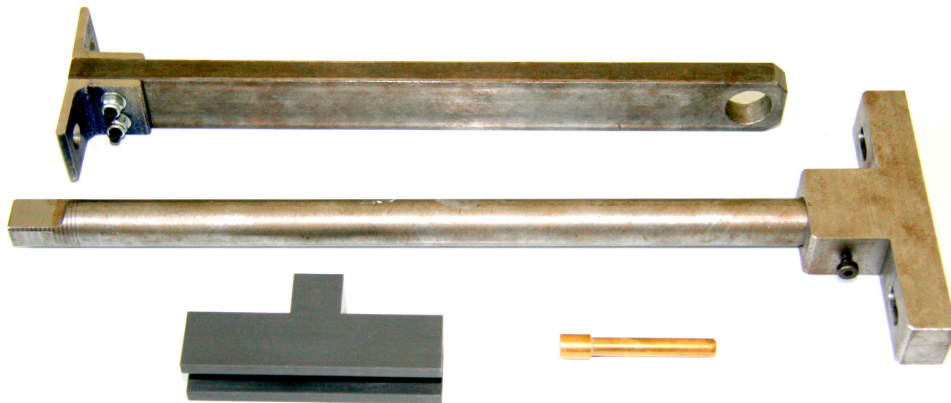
Disassembled Flexure Mount Calibration Jig
